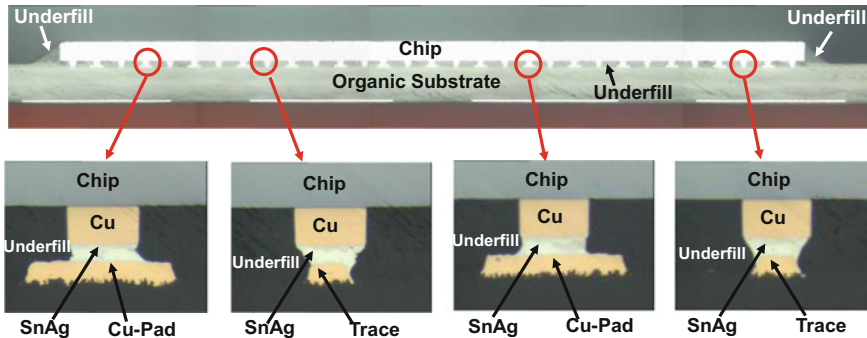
Typical cross section of stencil-printed underfill for flip chip on organic-panel assembly
